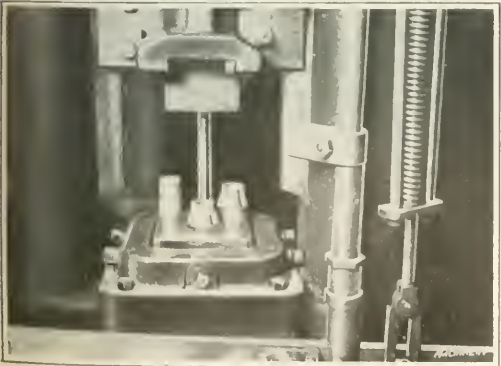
Close View of Percussion Press shown in Fig. 130 showing Dies used and Casting before and after forging
